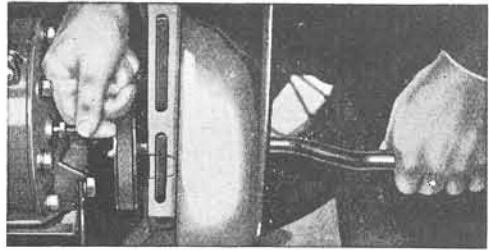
Setting No. 1 piston on top of compression stroke. When piston reaches the end of the stroke, the timing-pin will slip into a small recess in the camshaft gear.
